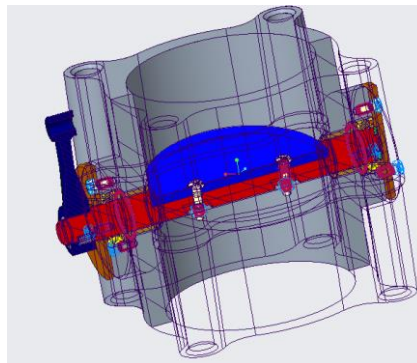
Global interference checks showing only O-rings and threaded parts containing interference
